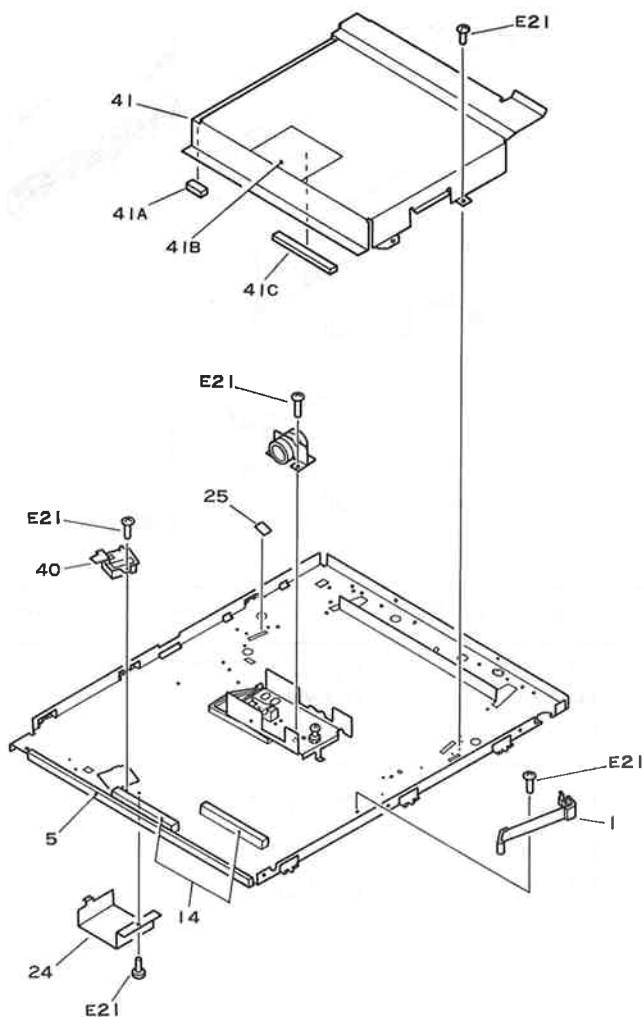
LENS MOUNT ASSEMBLY ($\frac{3}{2}$)
